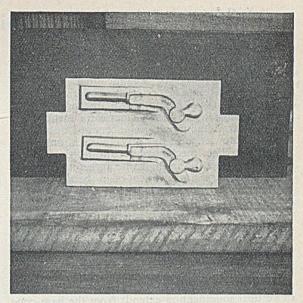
Matchplate after being wire-brushed only, no other Dressing being necessary.
